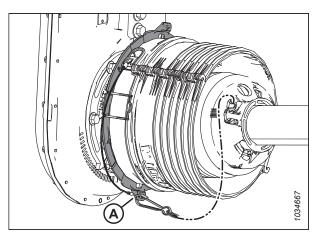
Chain Secured to Driveline on Float Module Gearbox
